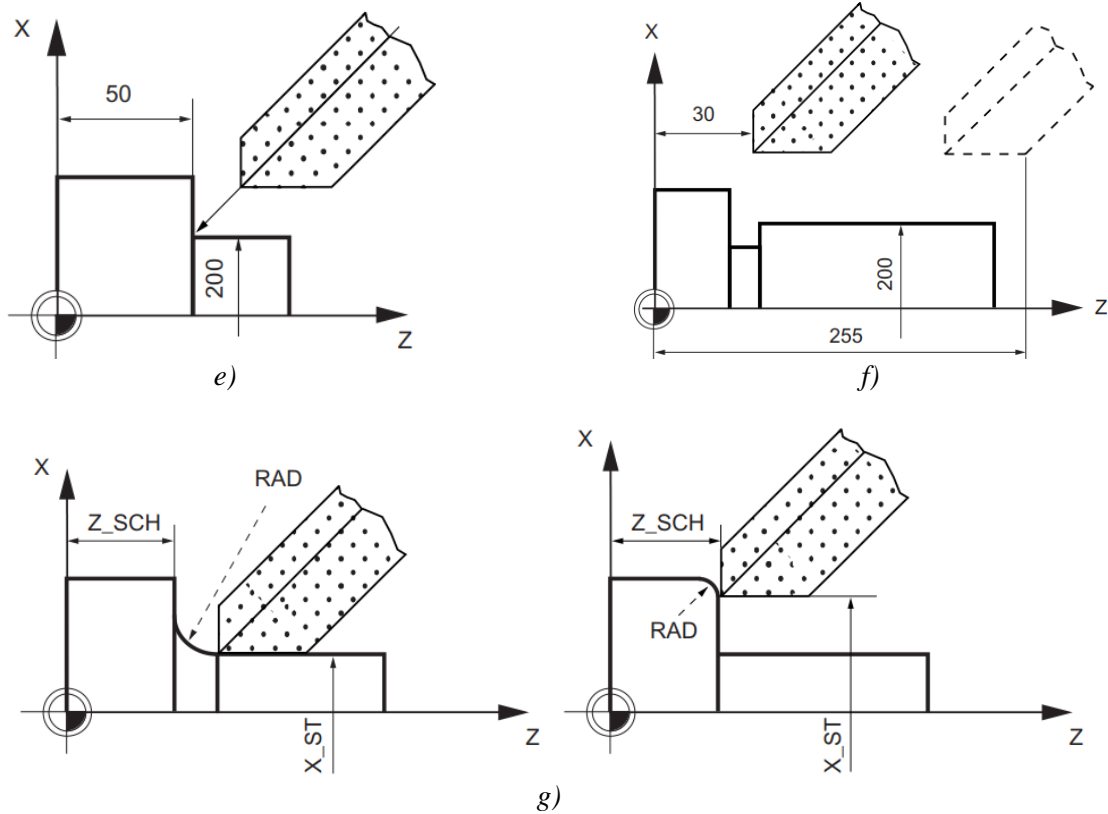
SINUMERIK 802D sl CNC cylindrical grinding machine cycles [7]:
